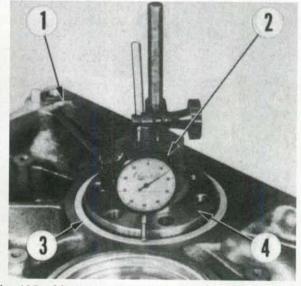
After renewing crankshaft rear oil seal, use a dial indicator to check runout of seal as shown.
